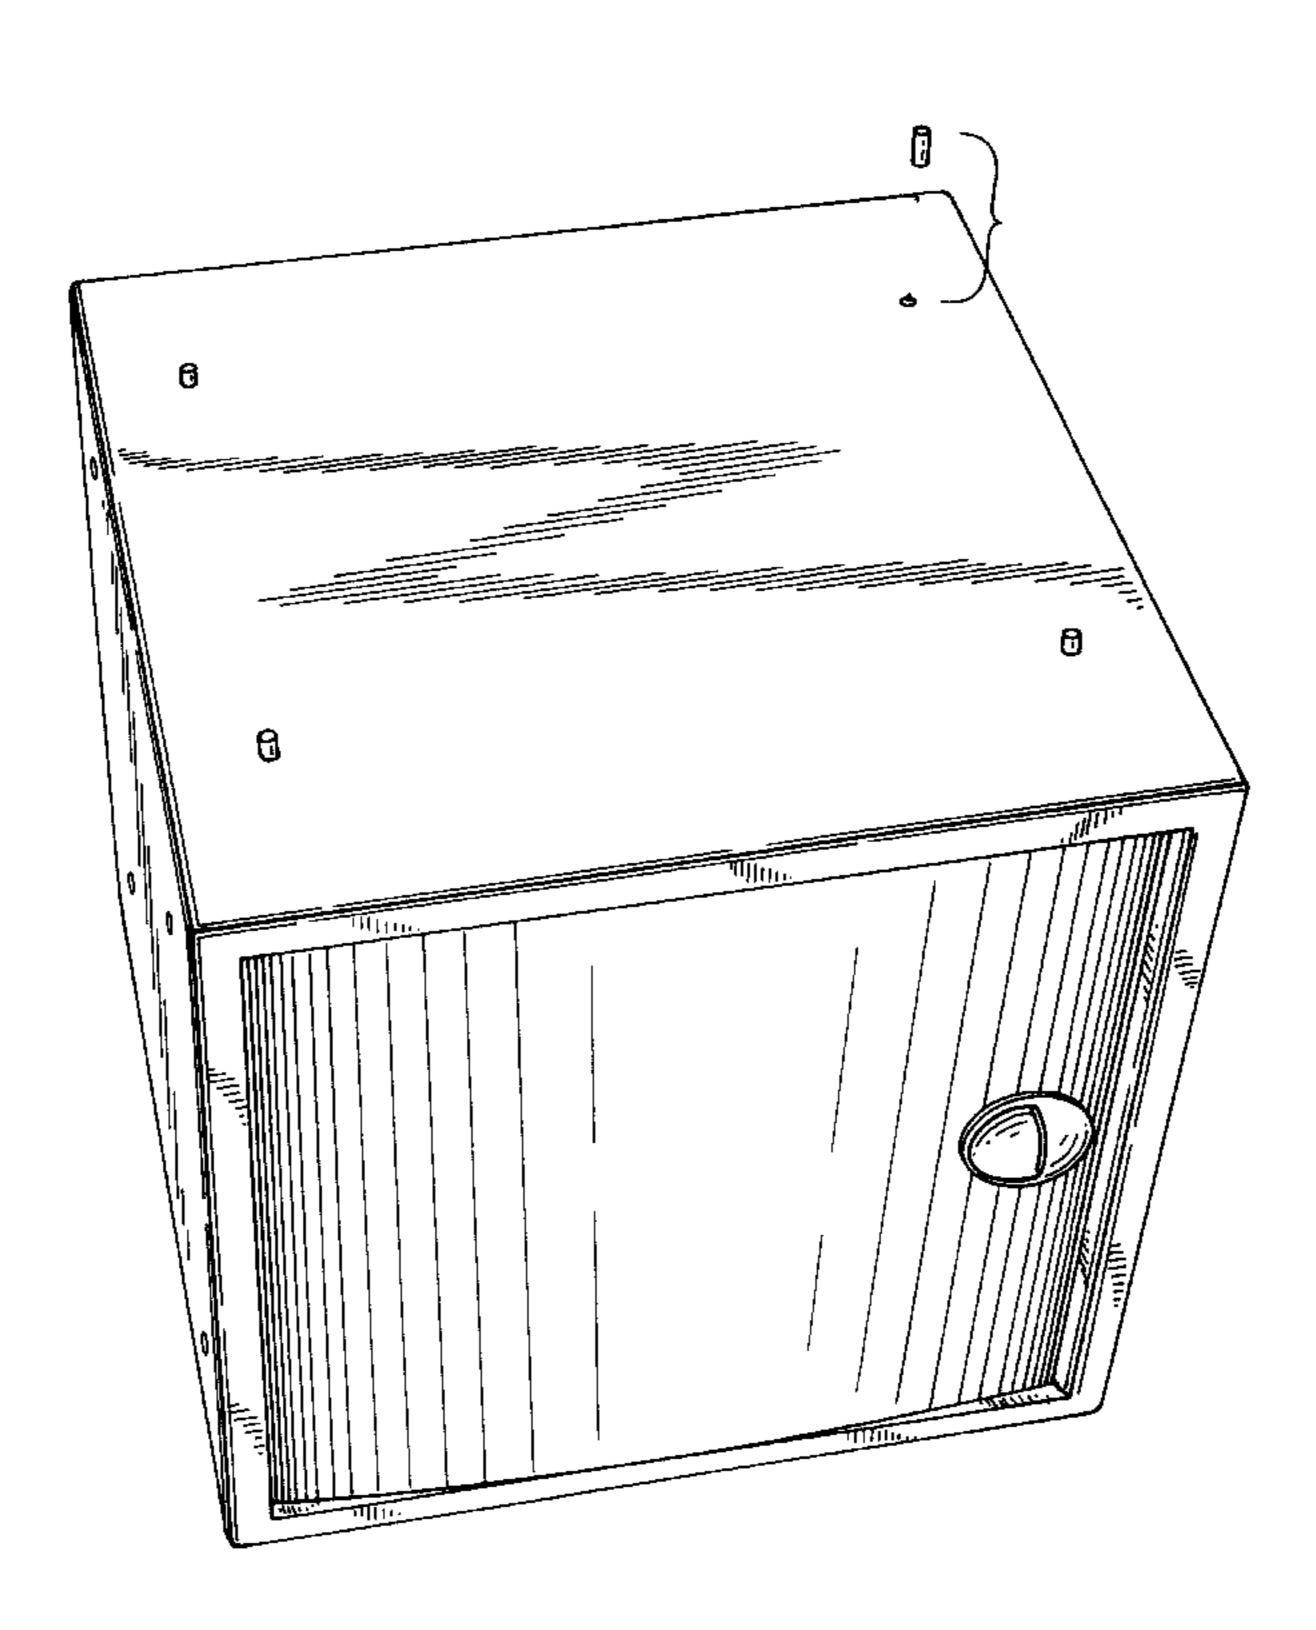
is a bottom perspective view thereof showing the bottom and right surface of the cabinet.
